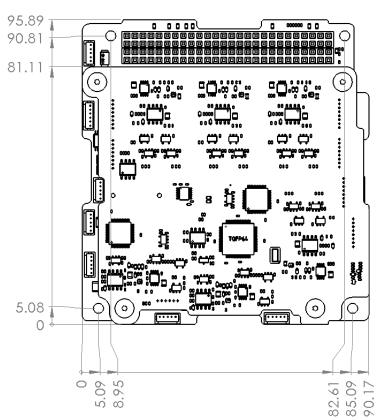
Dimensioned Drawing of 25-02452 3UA EPS
